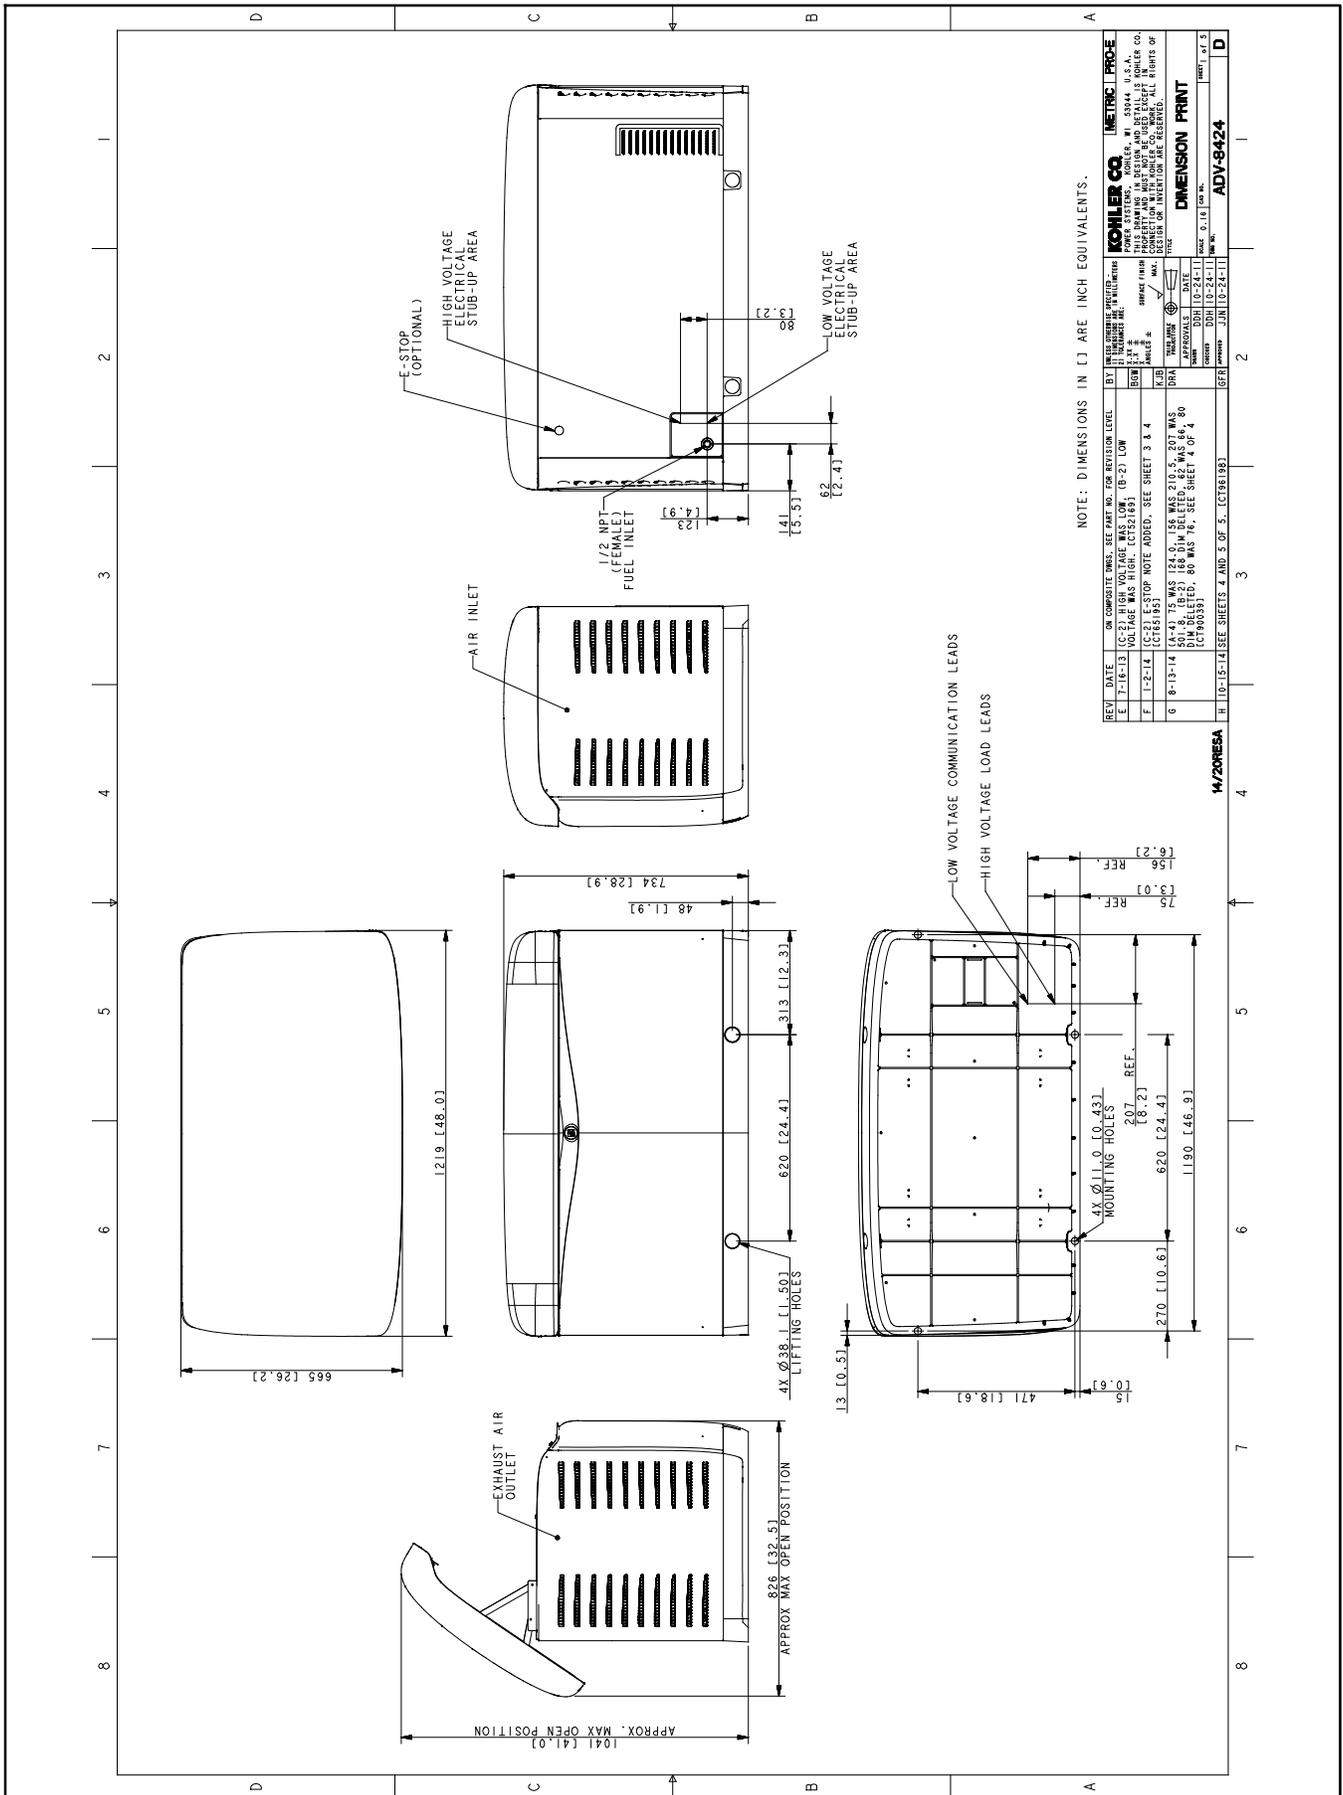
Dimension Drawing, 14/20RESA/RESAL, ADV-8424, Sheet 1 of 5
